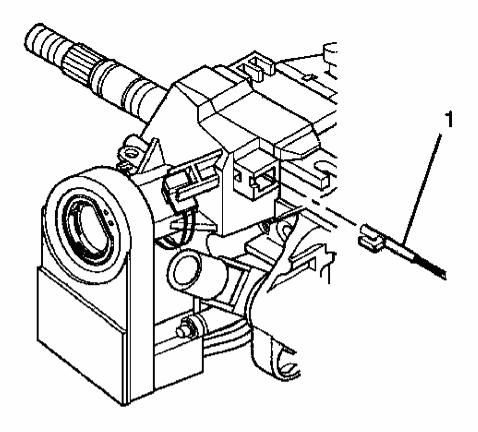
Identifying Park Lock Cable At Ignition Lock Cylinder Courtesy of GENERAL MOTORS CORP.
